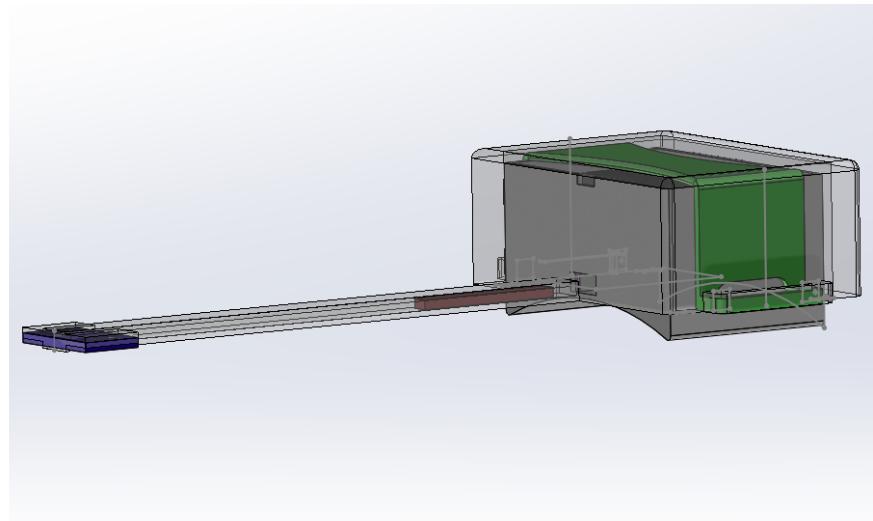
Assembled CAD model. The Top Half of Wrist Housing is a clear color to demonstrate Dragonskin 10A, with the PLA pieces overmolded inside of it.
